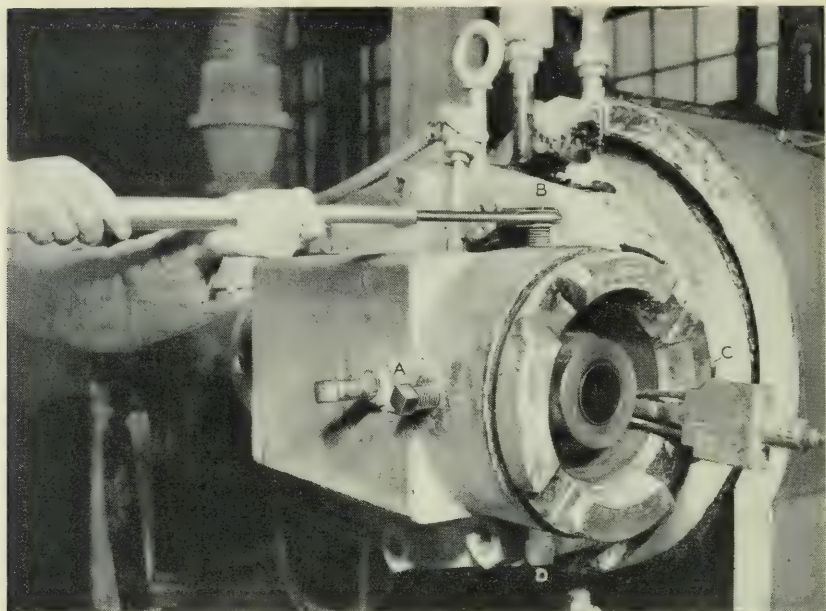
Core tube and die assembled in extruder head and die adjusting screws.
